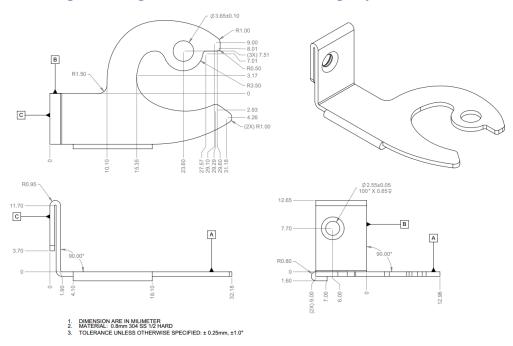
Large Card Standard I/O Bracket – Right Ejector Lever
